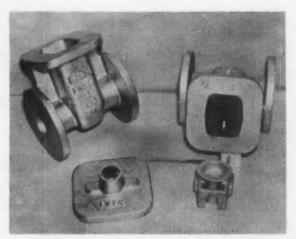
Valve components cast in rammed graphite molds by static casting techniques.
